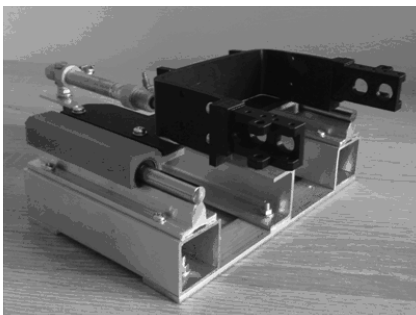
Set of warp guide bars of fabric sidewall during assembly (thrust bearing mountings marked in red and bar holder marked in black – 3D printing).
